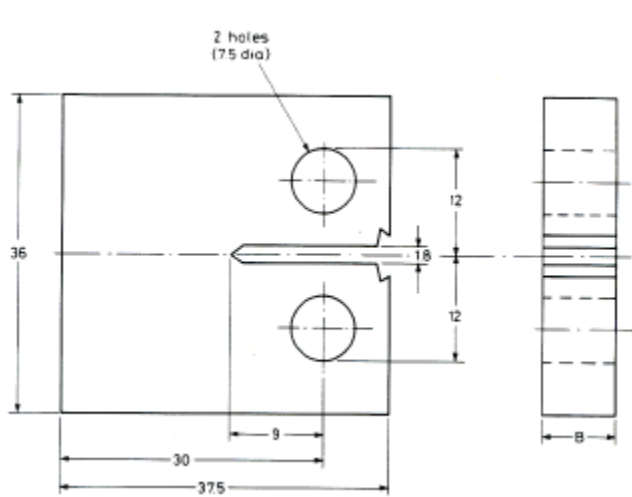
Typical CT specimen geometry used in fracture toughness testing
